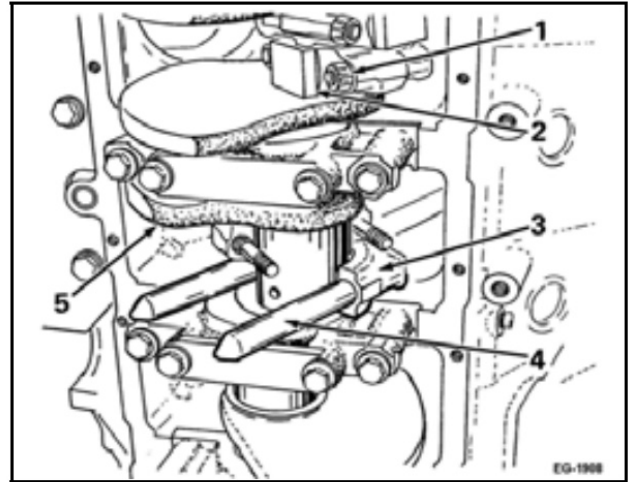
Installing the Connecting Rod Guide Protector Caps (Old Style Connecting Rod)
